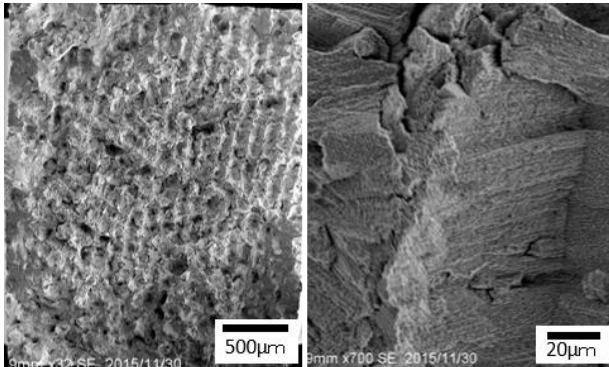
Fracture surface image of direct aged vertical specimen after creep rupture test.
